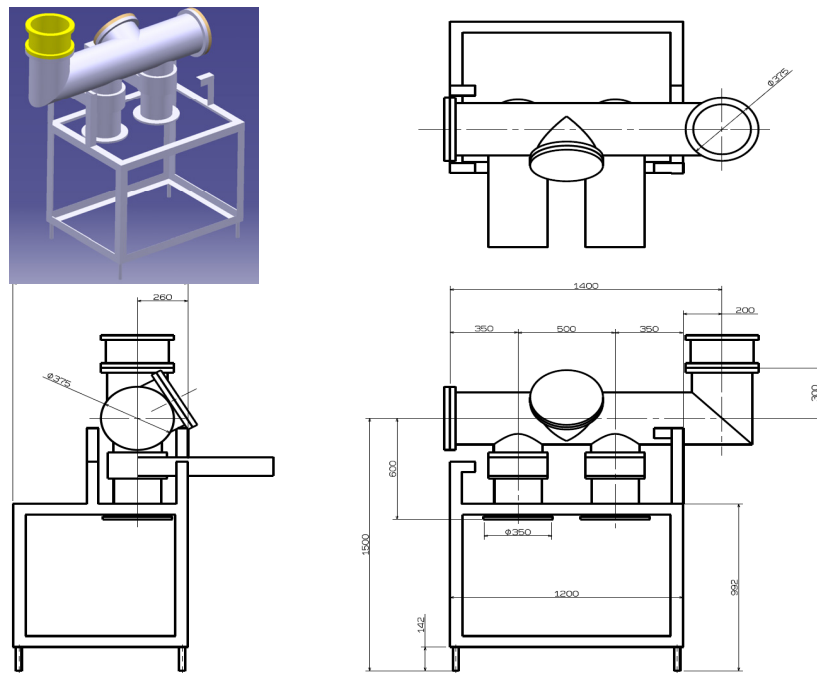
Main dimension of vacuum pumping system for CHS
